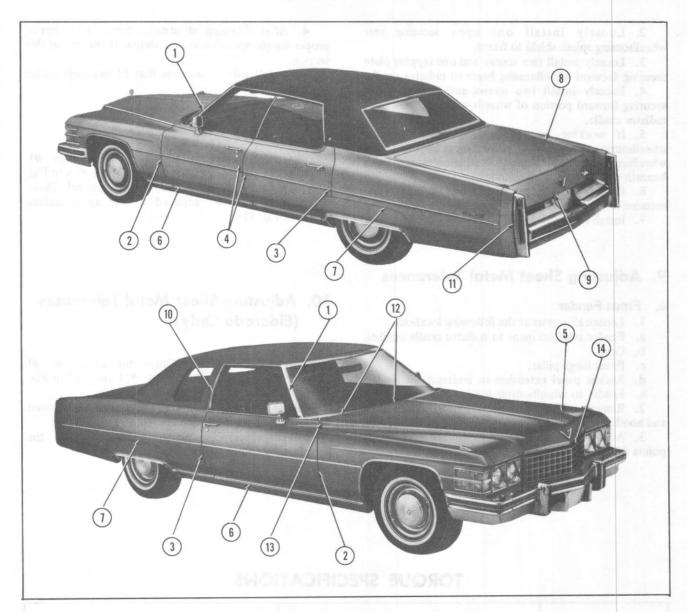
Sheet Metal Tolerances (Except Eldorado)
